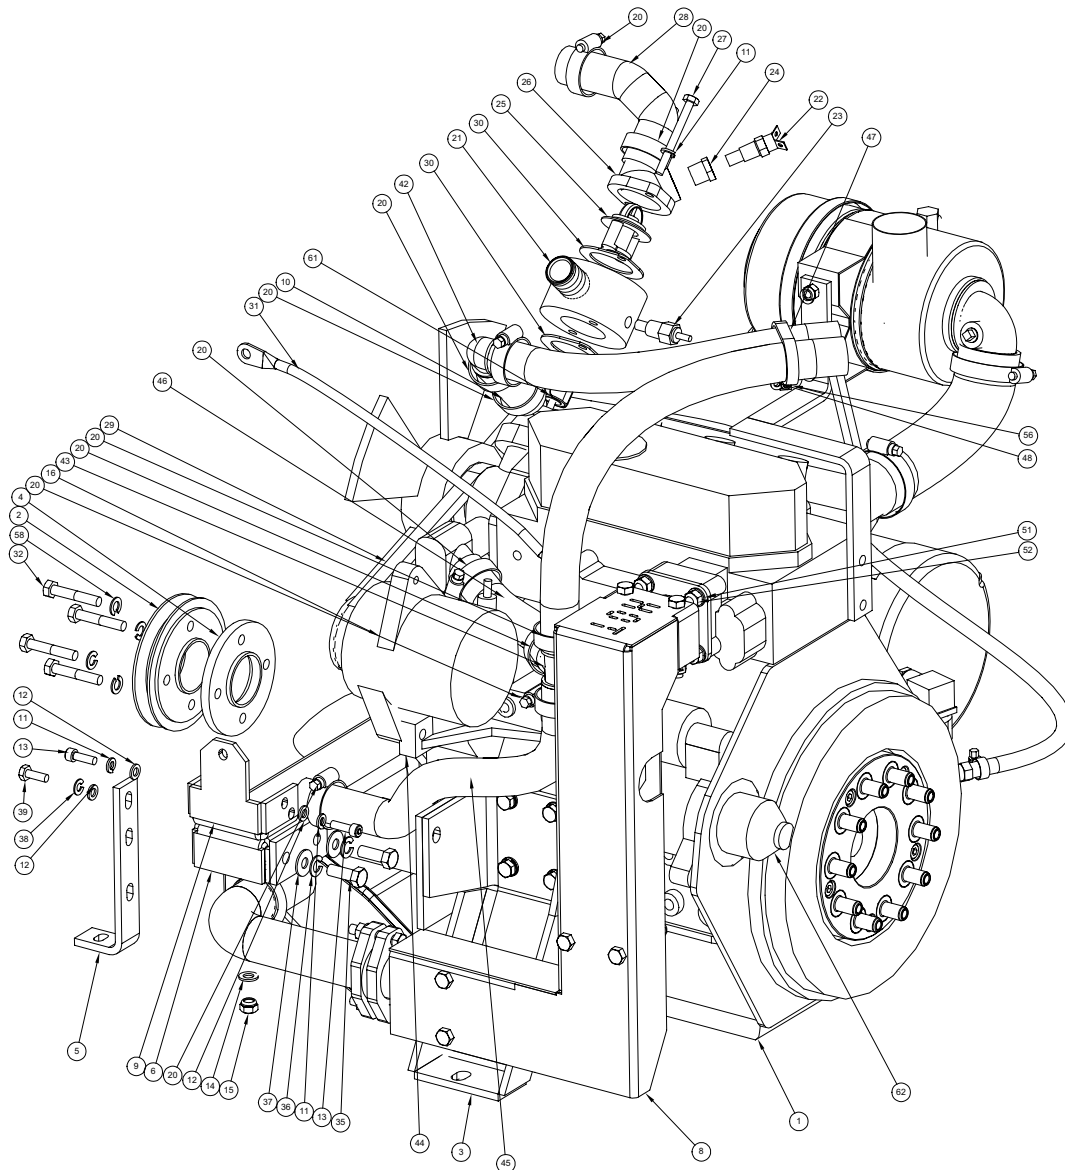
Engine Assembly CTS 450 Diesel - Left View
